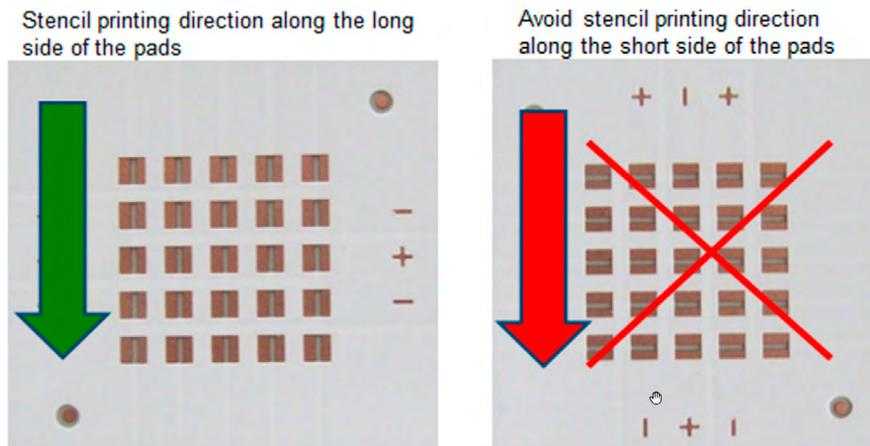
Orientate the PCB such that the stencil printing direction is along the long side of the pads.
